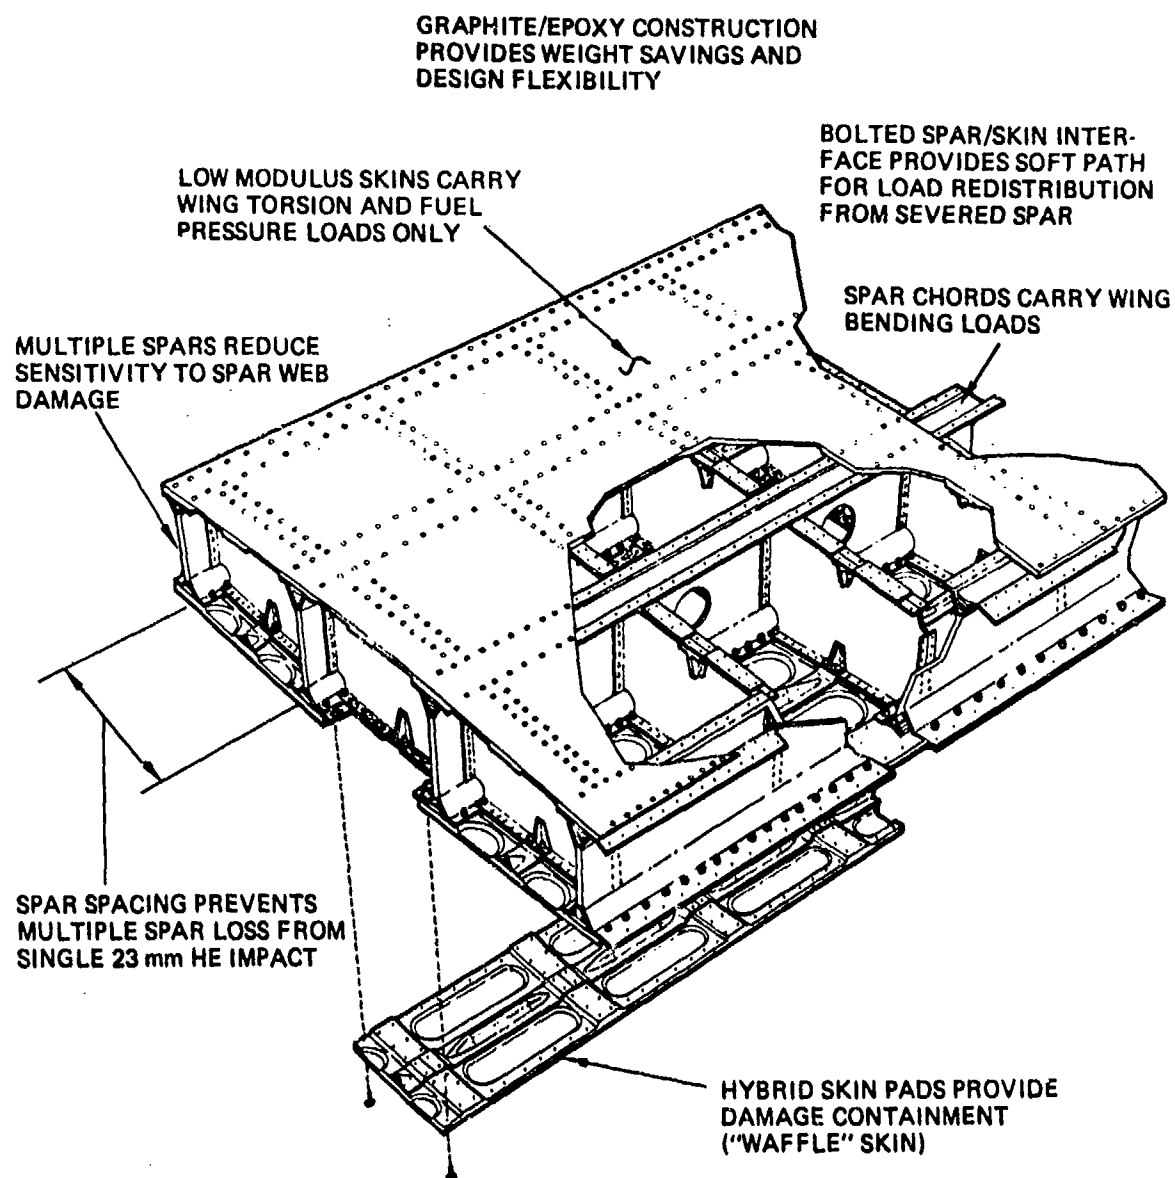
Battle-Damage-Tolerant Wing Final Design—Design Summary
